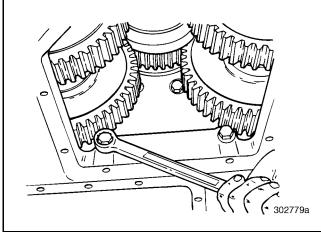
Removing Outer Rear Case-to-Main Case Capscrews
